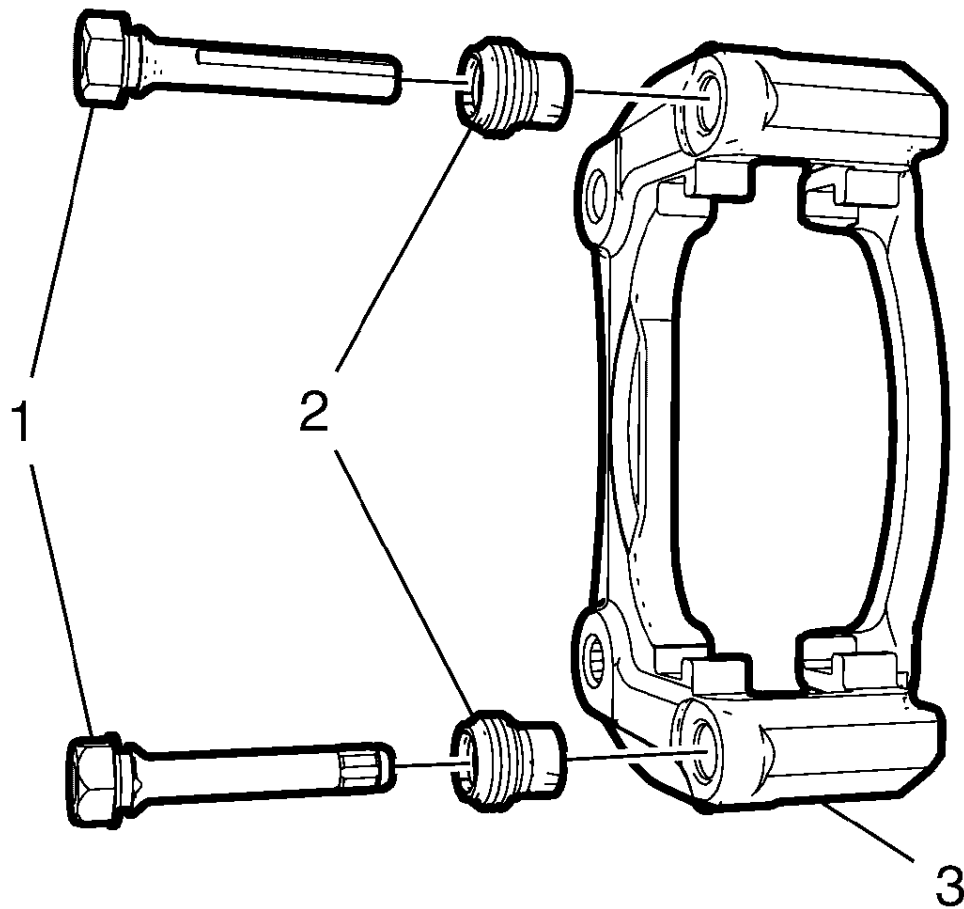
Brake Caliper Guide Pins, Boots And Caliper Mounting Bracket
